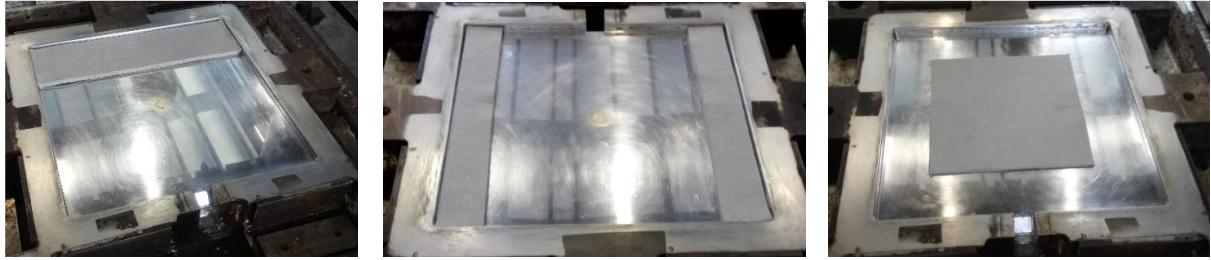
Charge patterns, similar to SFRP, with weld line and part like.
